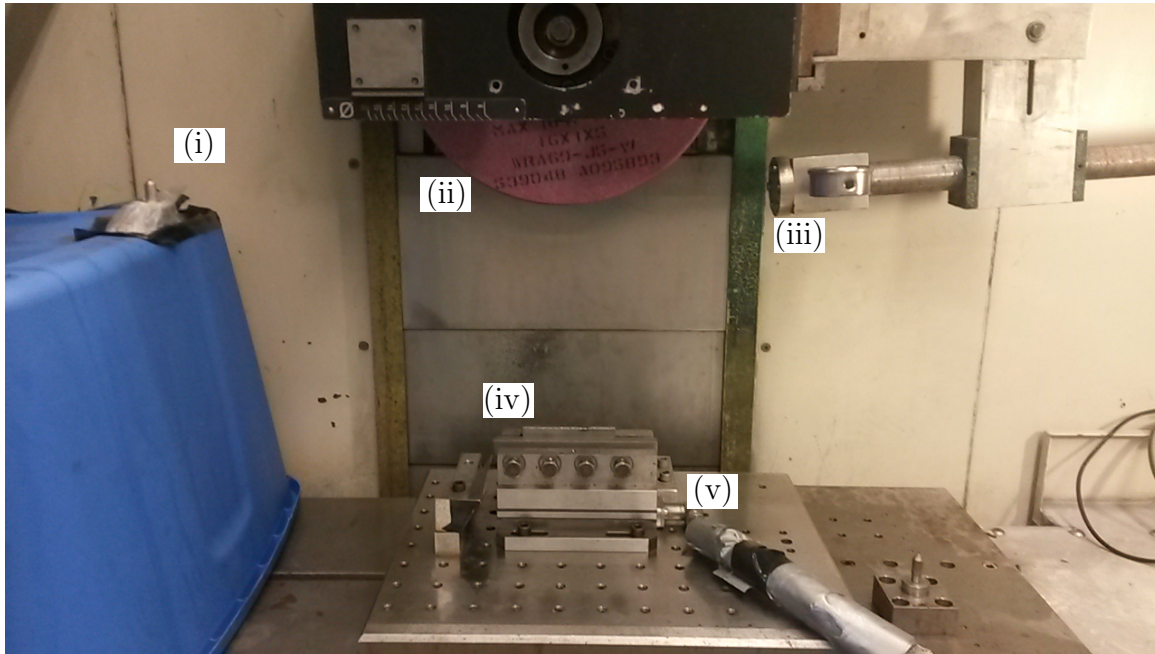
Experimental setup for the profile grinding experimental investigation showing (i) *EDGR* inside of its protective shell, (ii) the grinding wheel mounted on the grinding machine spindle, (iii) the coolant jet nozzle, and (iv) the workpiece mounted on top of (v) the dynamometer.
